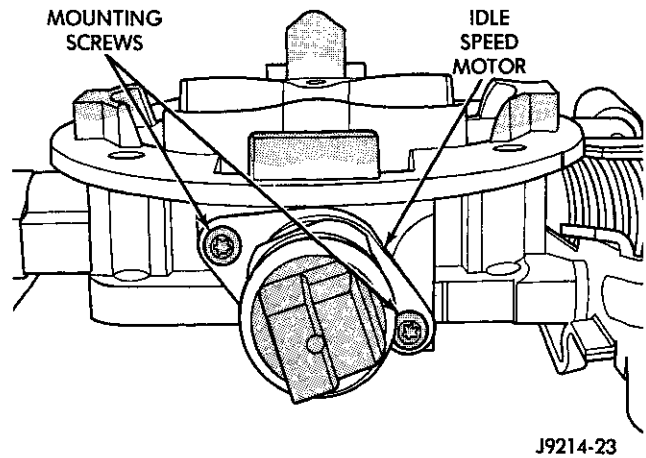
Mounting Bolts (Screws)—IAC Motor—3.9L/5.2L/5.9L Engines
